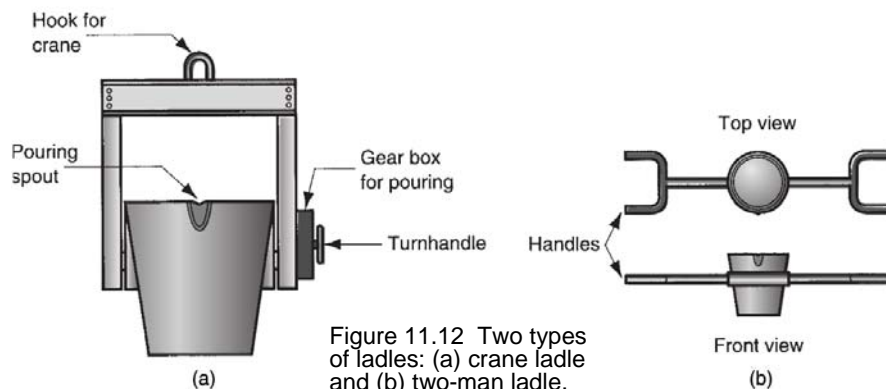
Two types of ladles: (a) crane ladle and (b) two-man ladle.
